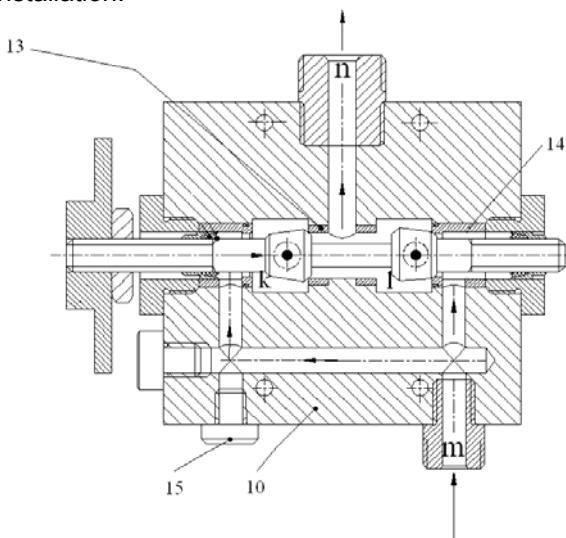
Section through the hydraulic directional control valve with a horizontal plane
